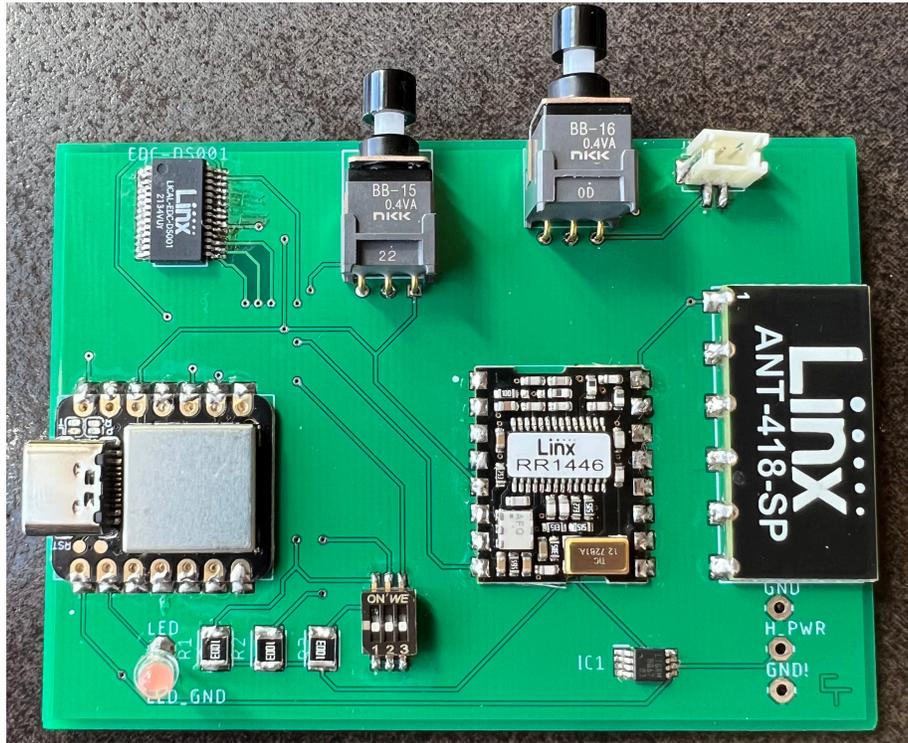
Receiver 2.0 JLCPCB Fabricated Board
